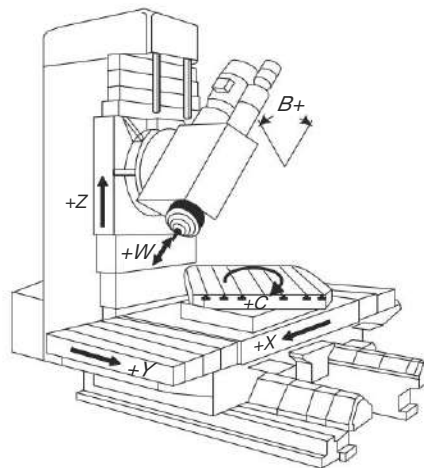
Five-axis CNC vertical axis machining centre configuration
